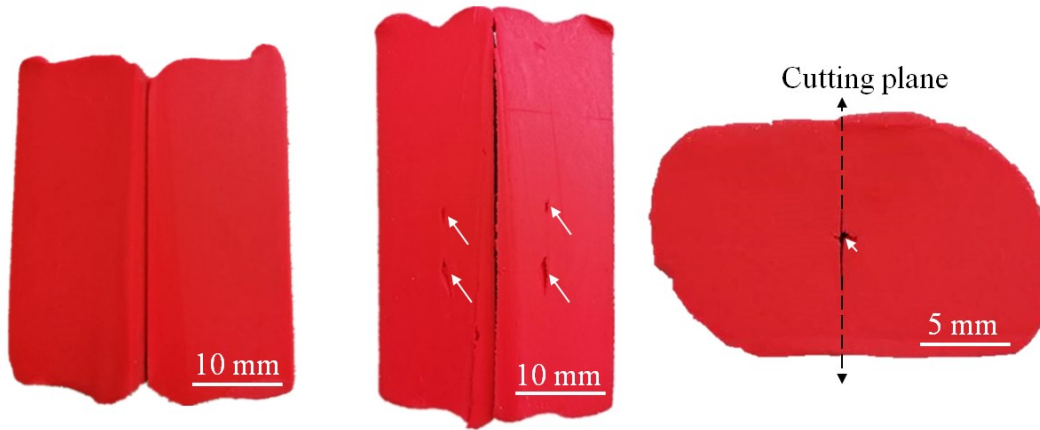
Crack conditions in the rolled samples after cross wedge rolling: (a) crack-free (Case 7 in Table 6.1) and (b) cracked (Case 8 in Table 6.1) on (b1) longitudinal section and (b2) transverse section (the white arrows indicate the central cracks and the dashed black arrows show the cutting plane).
